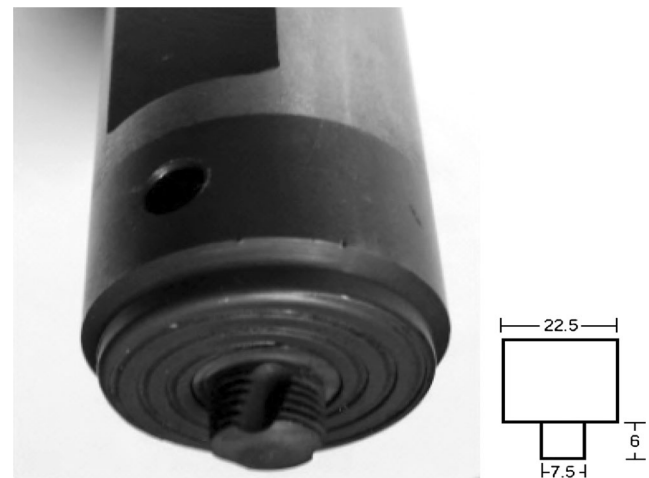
Selected FSW tool pin and shoulder (dimensions in mm) made from tool steel
